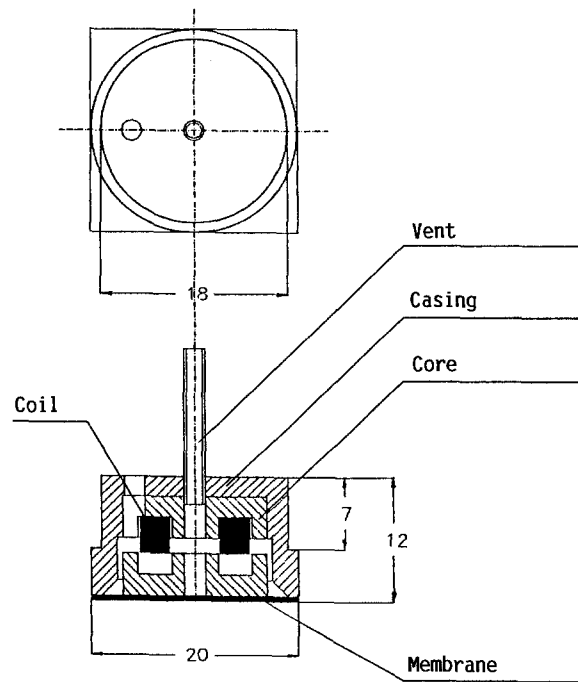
Cross-sectional view with dimensions (in mm) of the mini-vibrator
